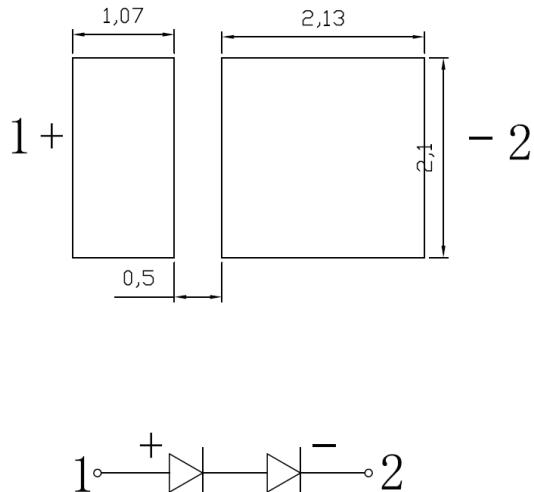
Recommended PCB solder pad layout for L128-xxxxRB35000A1, L128-xxxxRC35000A1, L128-xxxxRC35000B1, L128-xxxxRC35000C1, L128-xxxxRD35000A1, L128-xxxxRD35000B1, and L128-xxxxRE35000A1..
